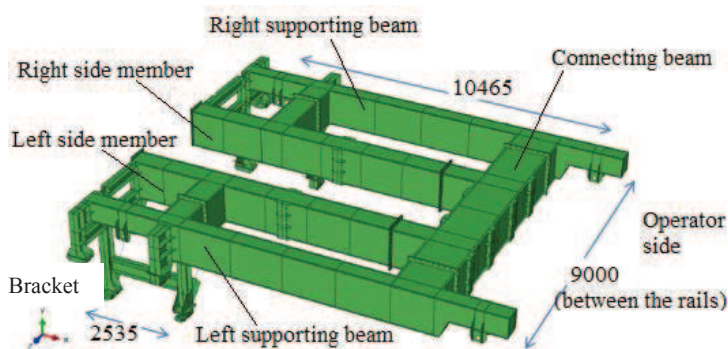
Layout of the carriage structure itself (dimensions in mm)
